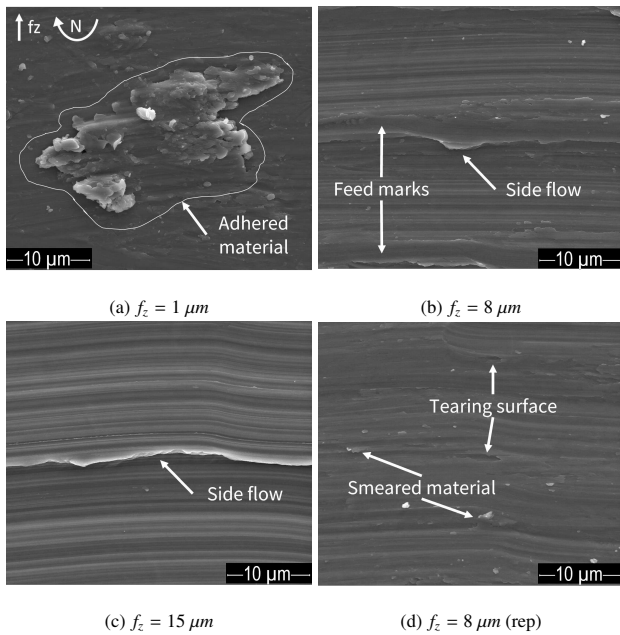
Micrographs captured near the machined length of 260 mm (coated tool) showing the surface defects on the machined slots
